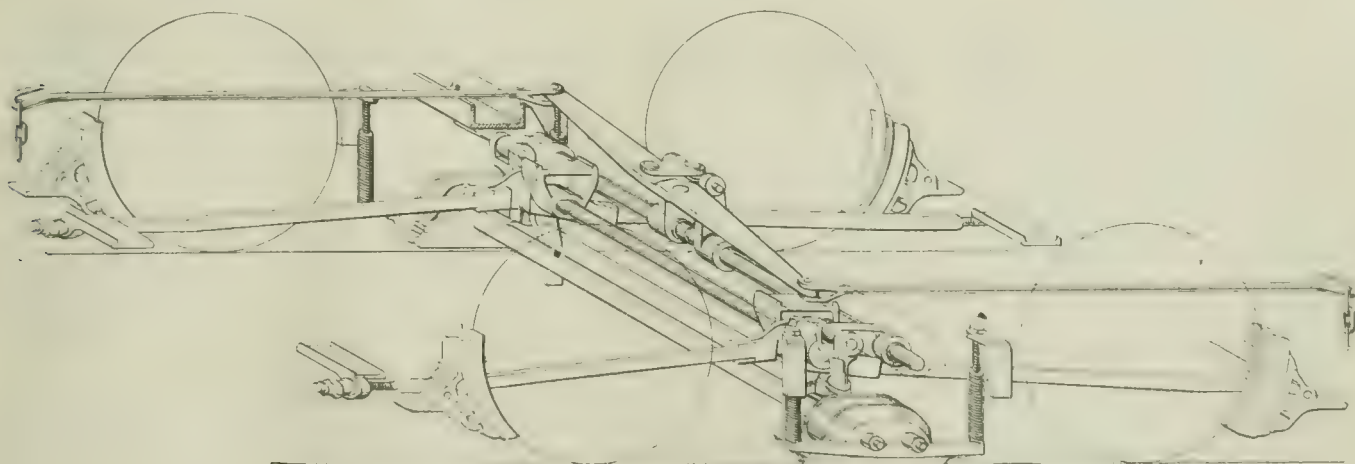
THE MECHANICAL ATTACHMENT TO THE WESTINGHOUSE MAGNETIC BRAKE.
